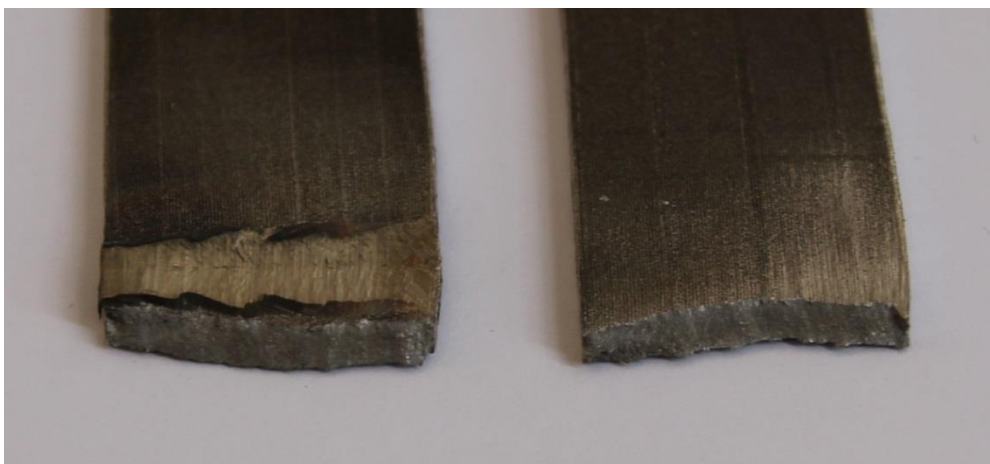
Fracture surfaces of a welded SLM test piece.
